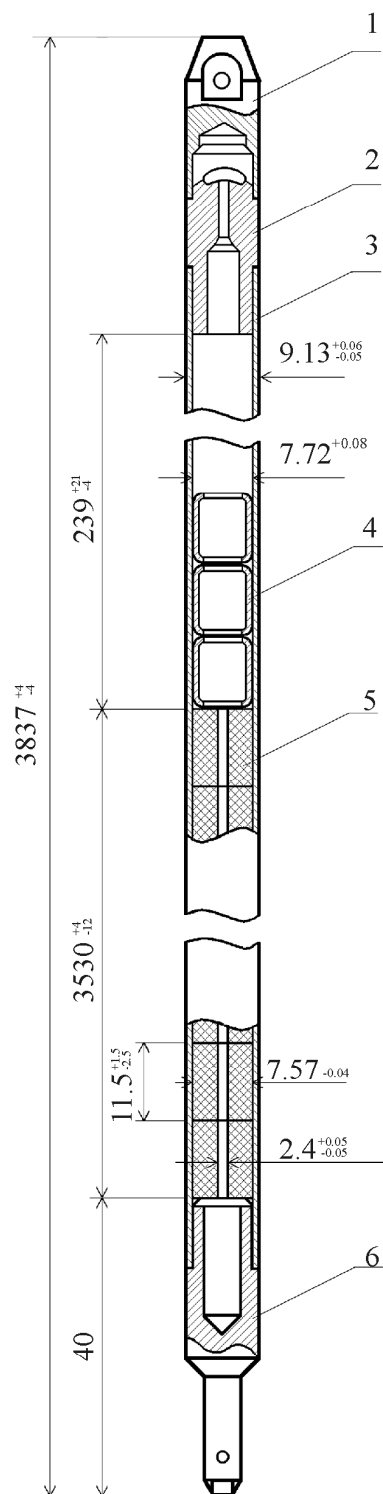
Design scheme of VVER-440 commercial fuel rod from the fuel assembly #14422222
